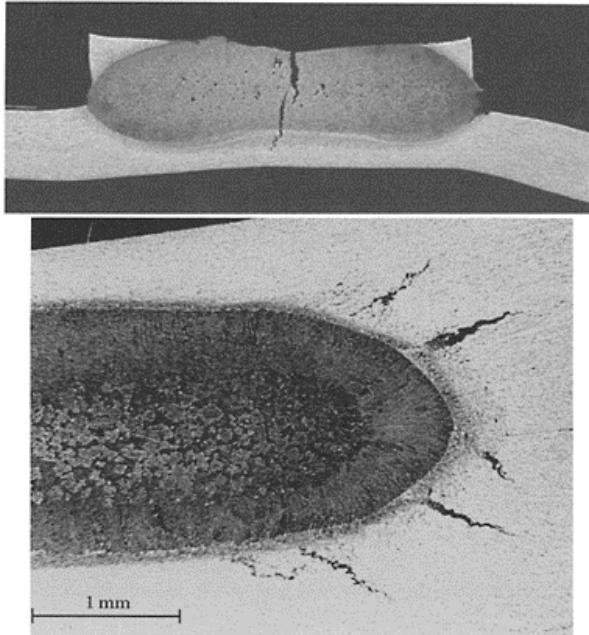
18 weld cracks in AA6111 (upper) and AA5754 (lower) [44]
